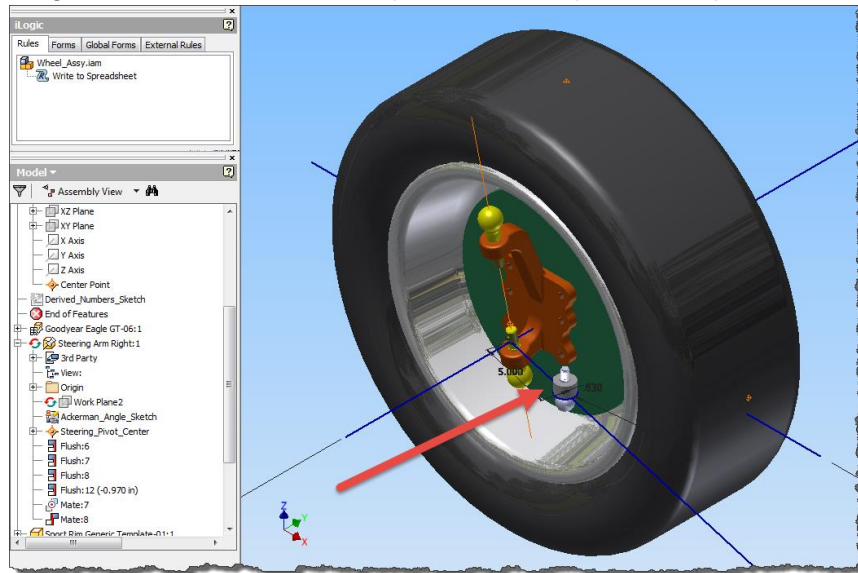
The steering arm doesn't need to be completely designed until later. Only the mounting boss for the tie rod end is required at this point.
